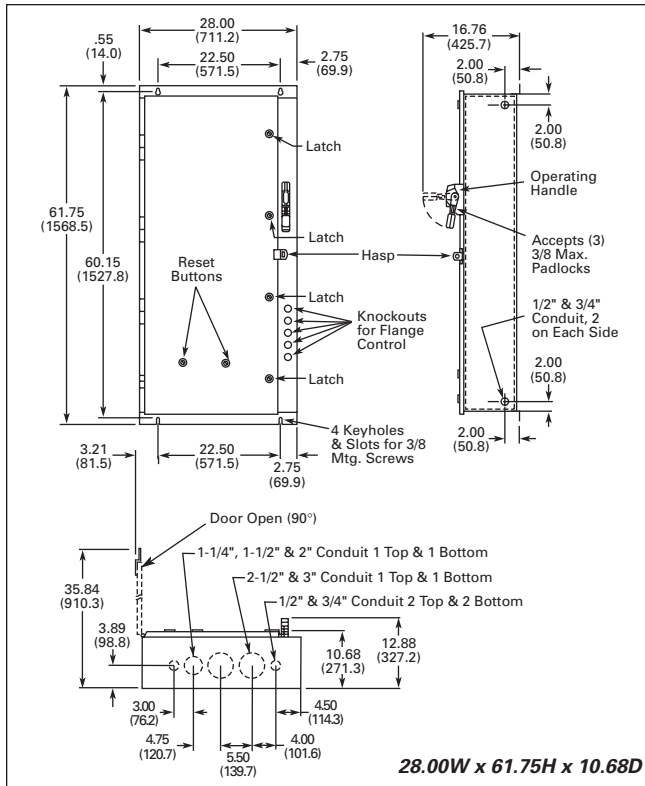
Box E, Type 1 — Approximate Dimensions in Inches (mm)
